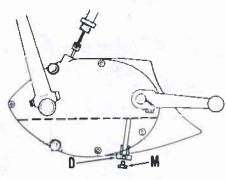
The gear box oil level plug is shown at (M) and drain plug at (D). Filler plug is located at top near clutch cable.
